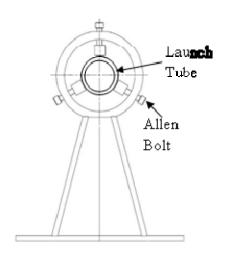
Launch Tube Support Assembly with Launch Tube [After 5]
